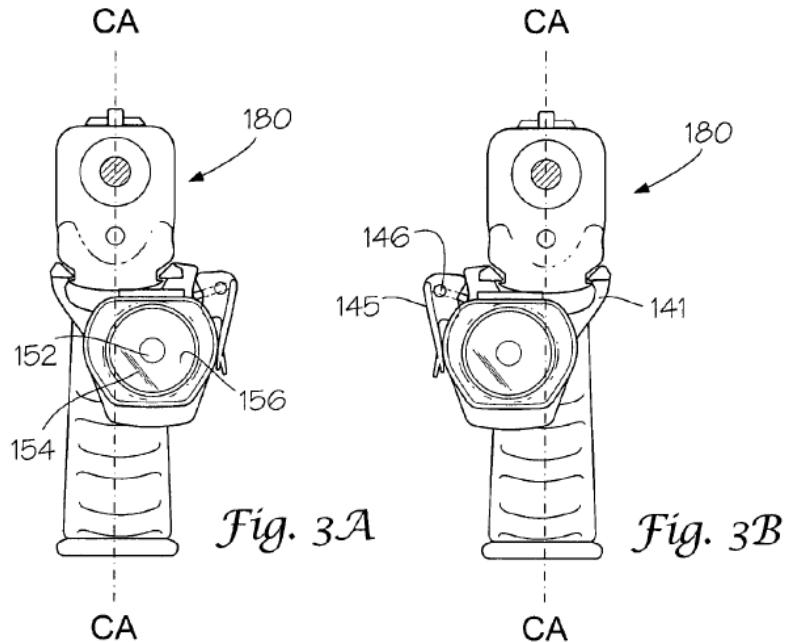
A shows a front elevational view of an offset mountable light mounted to a handgun for a left side application and Figure 3B is a front elevation view of an offset mountable light mounted to a handgun for a right side application. Kincaid '255, 3:1–8. Based on Kincaid '255's description of Figures 3A and 3B as two separate applications of the invention for a right or left side configuration of the light attachment, these figures do not show lateral movement to the side of Kincaid '255's clamp arm 143. Therefore, the record does not support the Examiner's finding that Kincaid '255's clamp arm 143 is capable of moving laterally.
